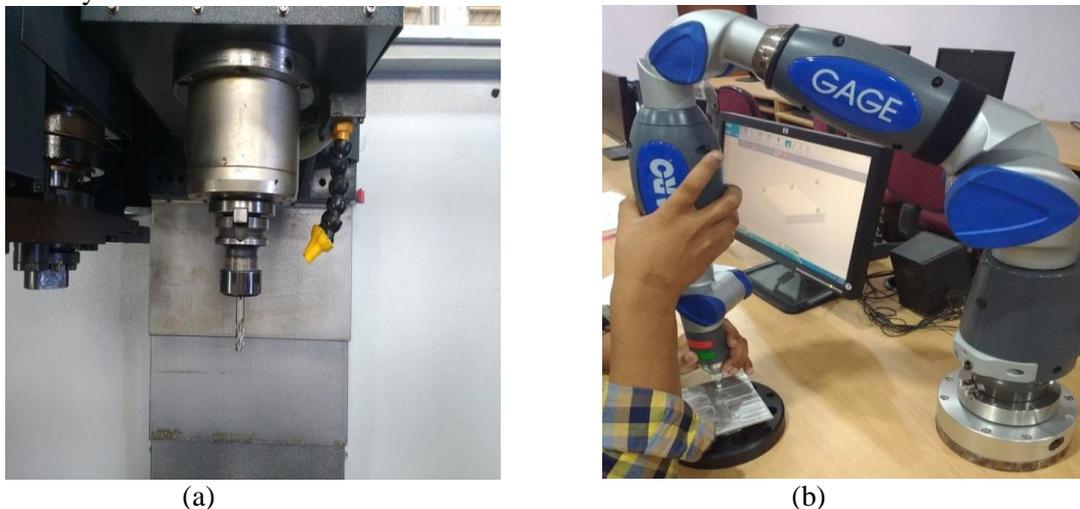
(a) Experimental set up for end milling operation (b) CMM for Flatness measurement
